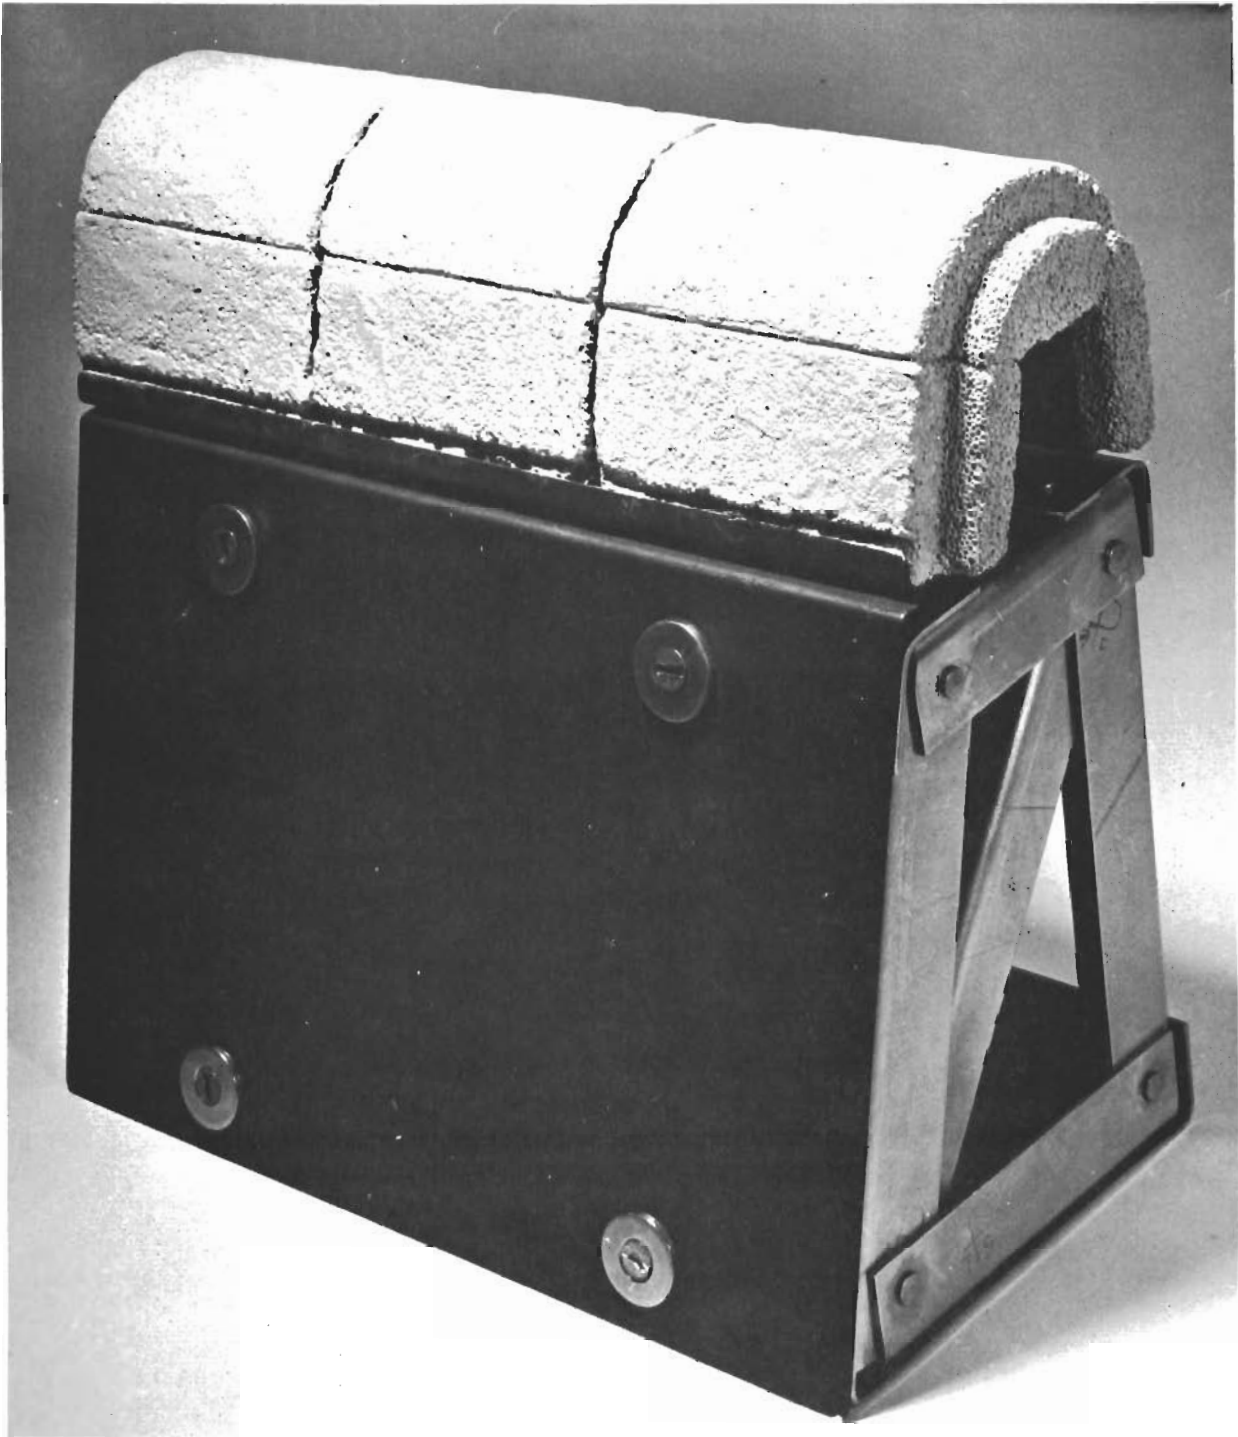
1.5-INCH RADIUS LEADING EDGE FINAL ASSEMBLY
